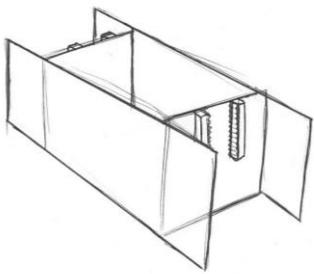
, PLACE OF THE GEAR RACKS ON INNER BOX BEFORE REDESIGN
